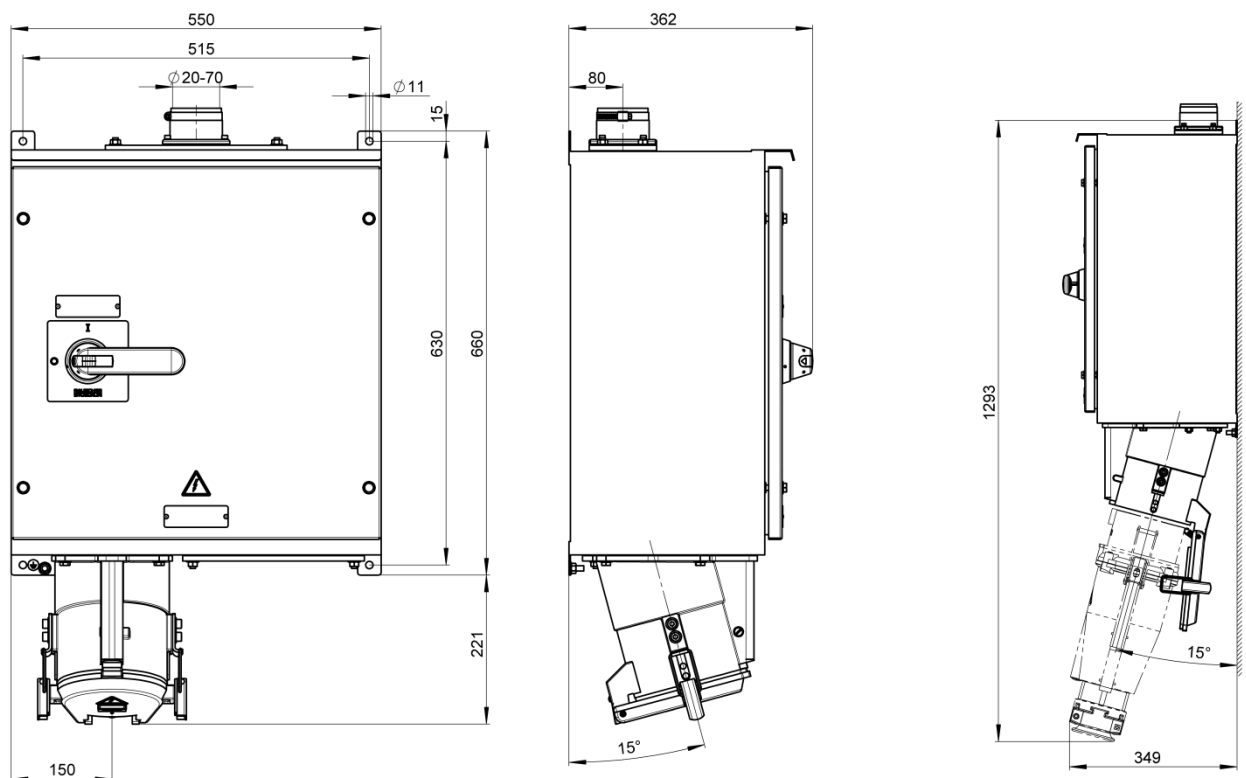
Dimensions Connector Unit with mechanical interlock CUMI B-Line (250 A – 400 A) in mm
